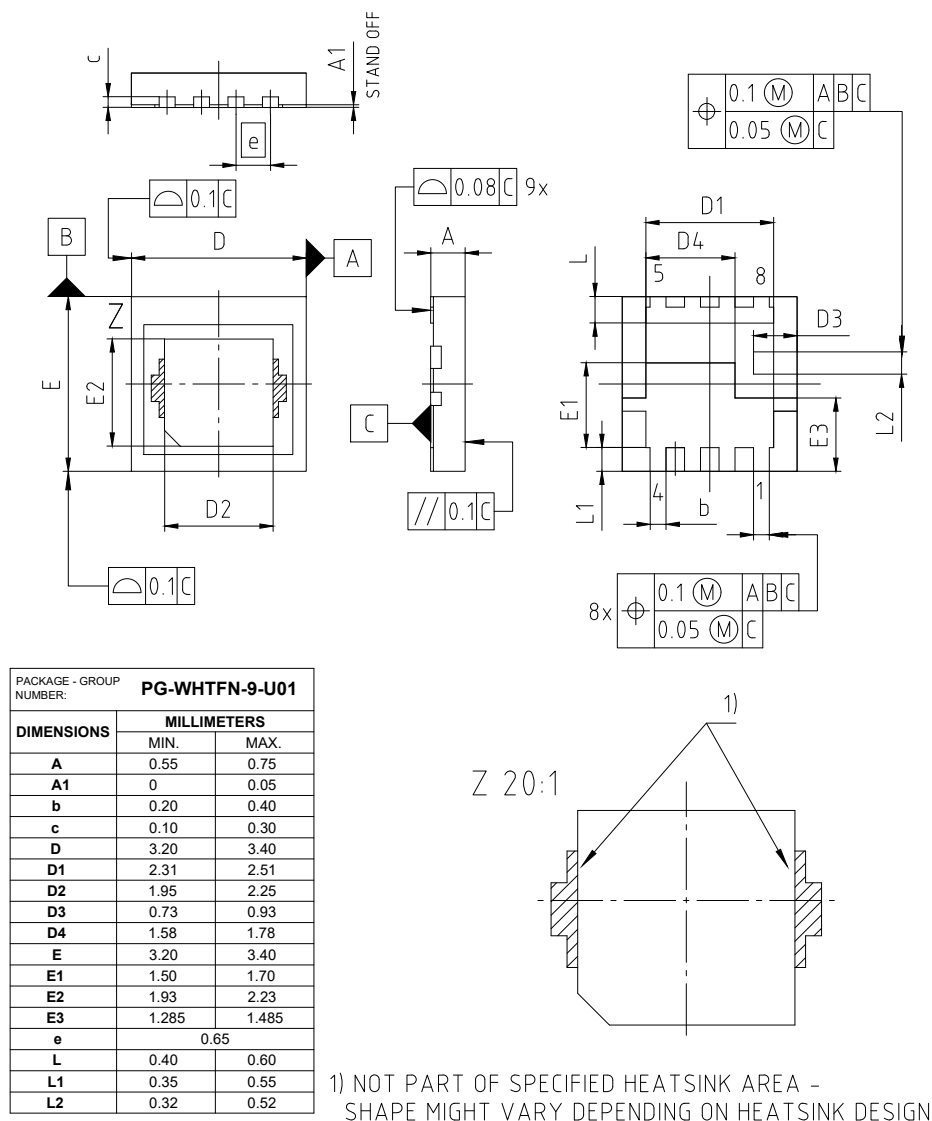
Outline PG-WHTFN-9, dimensions in mm
